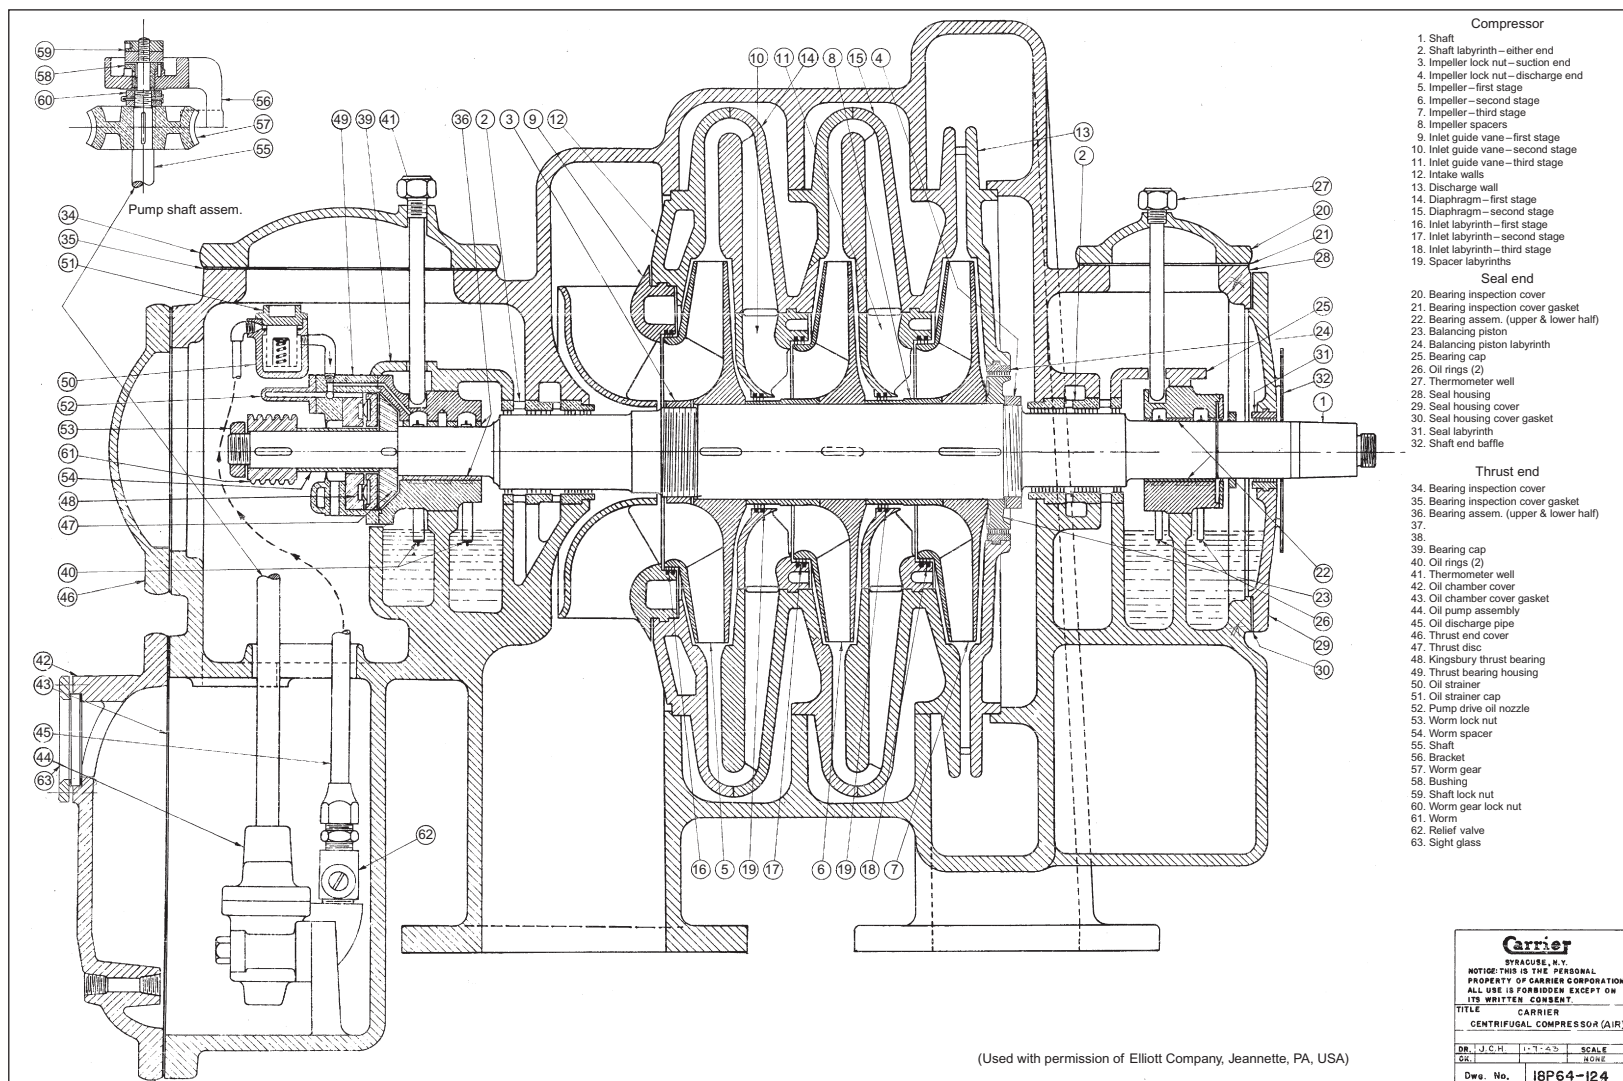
This centrifugal compressor was built by Carrier Corp in 1943 for refrigeration service. Note the shaft-driven oil pump and ring lubricated journal bearings.
